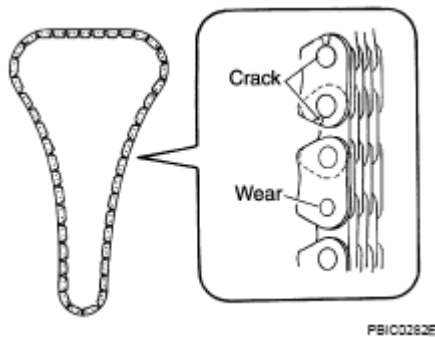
Identifying Cracks And Any Excessive Wear At Link Plates
